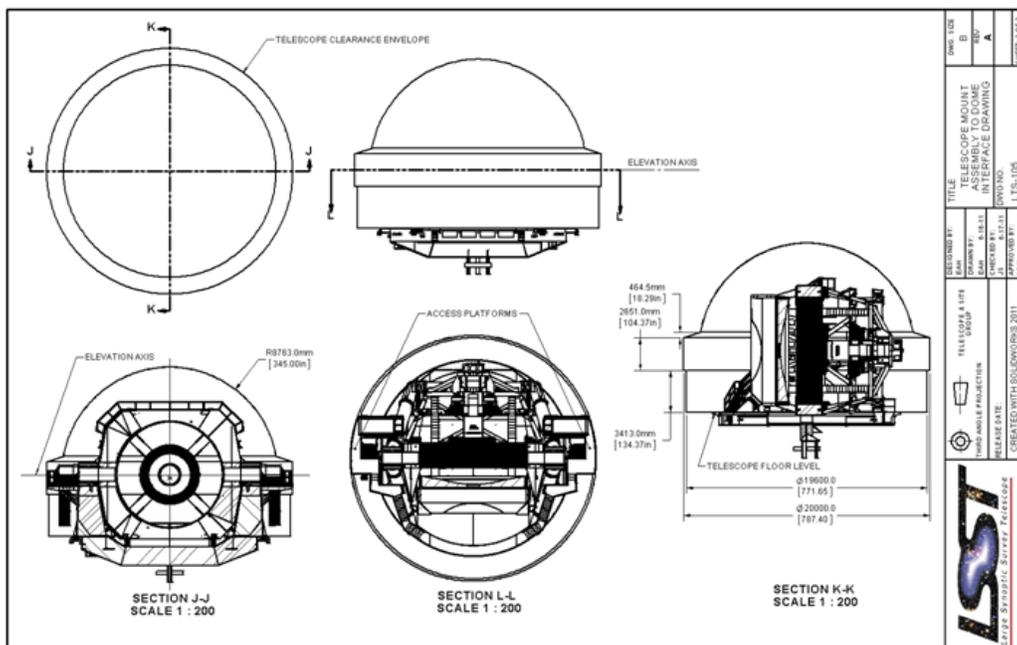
LSST Telescope Mount Assembly (with payloads) Design Envelope.
